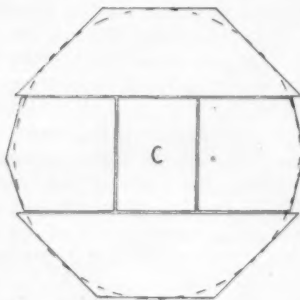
Diagonal, C, and protective pieces of glass blocked up on a tool for grinding and polishing.
